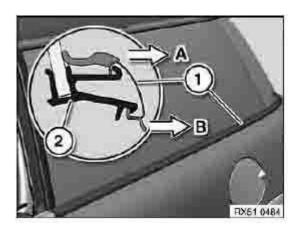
Uncliping Strip From Retaining Strip Courtesy of BMW OF NORTH AMERICA, INC.
